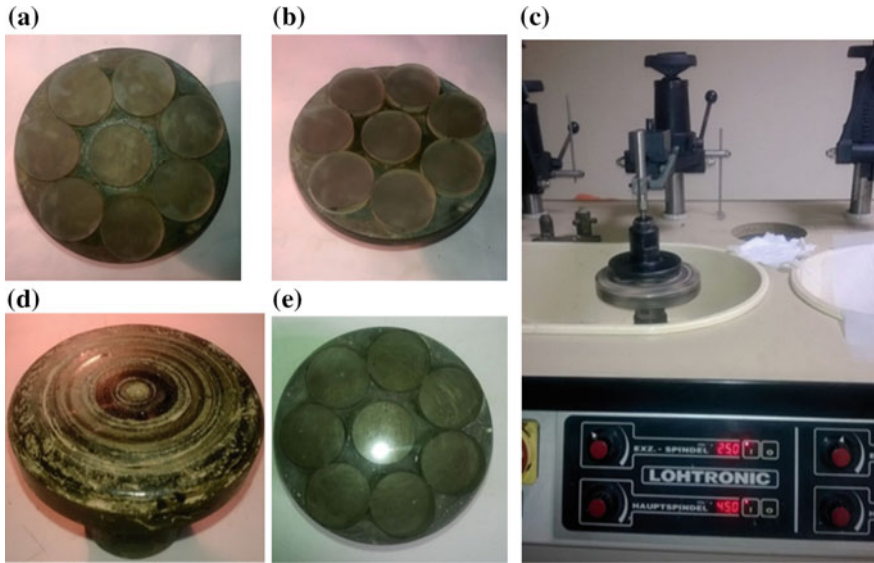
a Workpiece before lapping process; b workpiece after lapping process; c full-aperture polishing machine; d pitch polisher used for polishing; e workpiece surface after 2 h of polishing
